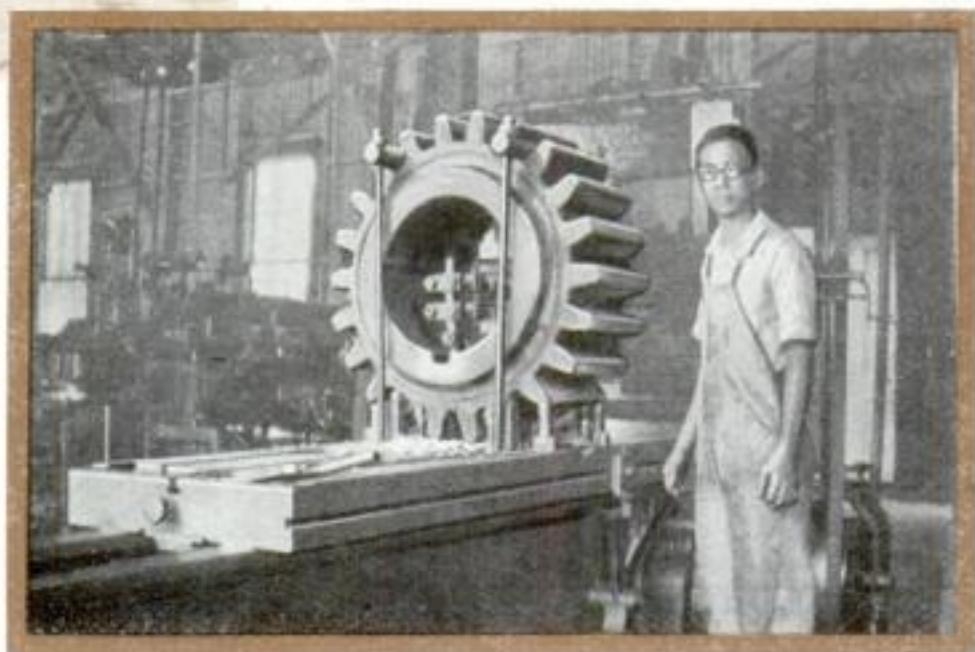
The photo Old Bill dug out of his files, showing T. Sakamoto, a machinist in Hawaii, using a planer to cut a keyway in a large gear
